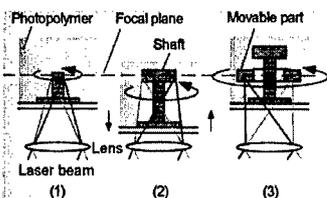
Assembly-free, single-step fabrication process of movable microstructures
